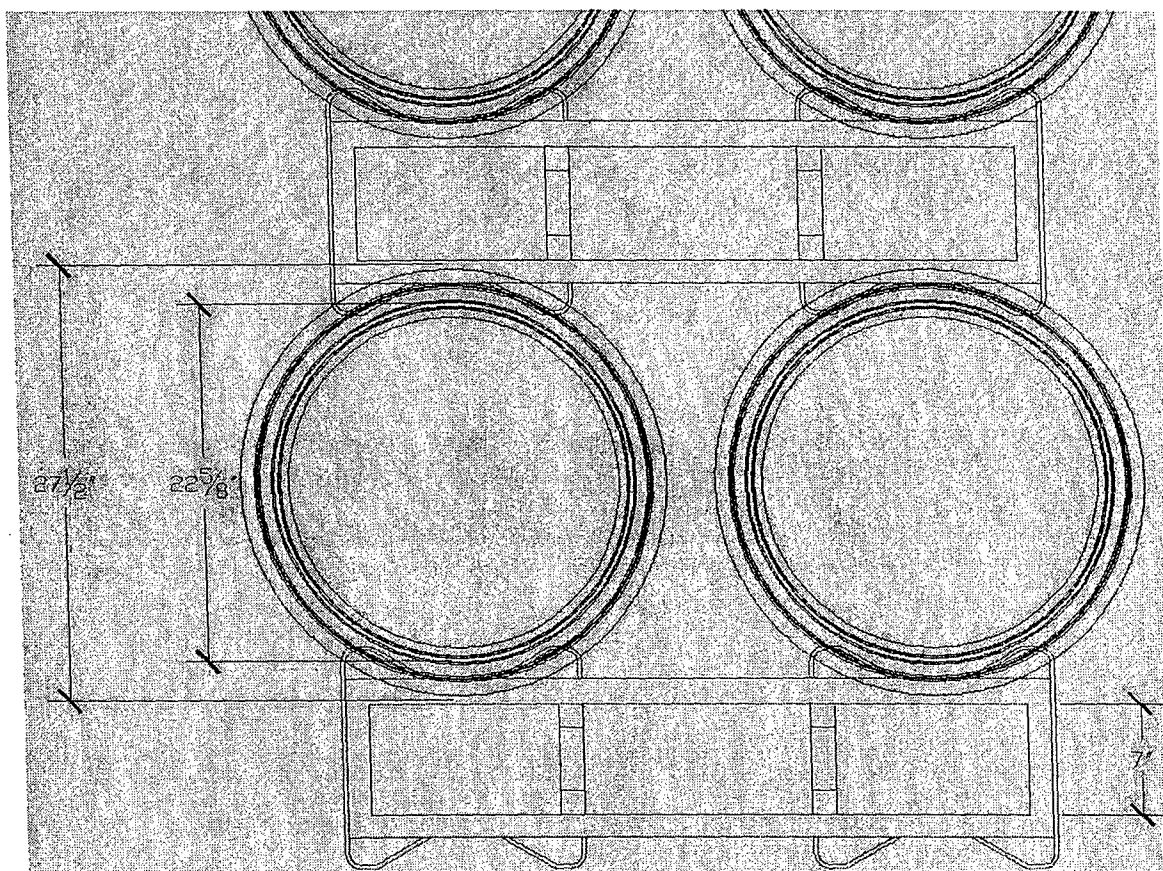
Typical 2 barrel stack and rack configuration.
